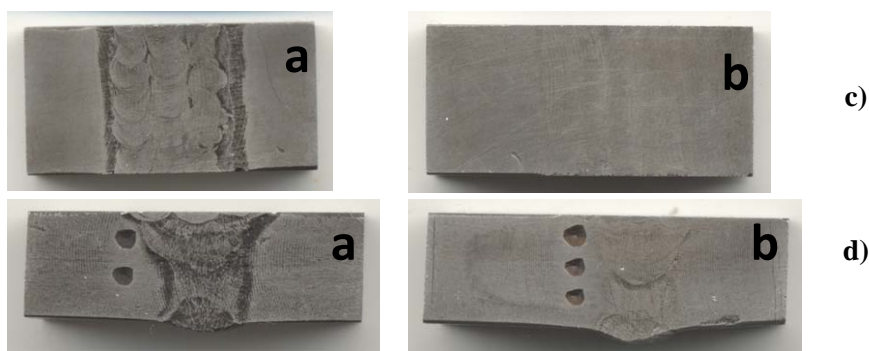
The macrostructures of welds under coatings deposited: a) DC; b) the pulsed - arc method, c) longitudinal section, d) cross-section.
